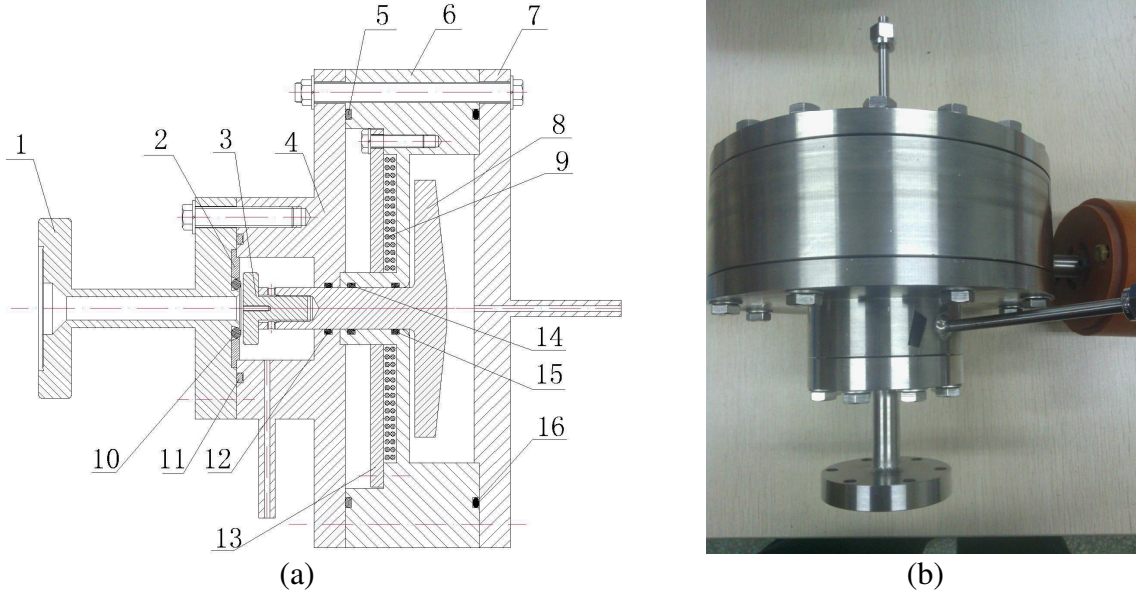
, (a) Structure of the valve: (1) CF 35 flange; (2) washer; (3) removable piston; (4) work chamber; (5), (10), (11), (12), (14), (15), (16) o-rings; (6) back chamber; (7) cover; (8) mushroom piston; (9) coil; (13) platen, (b) image of the fast valve.
